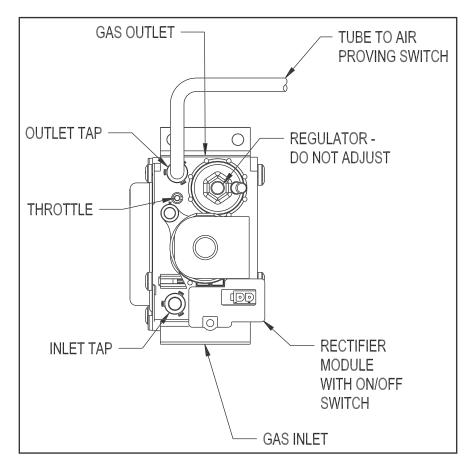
Gas Valve Detail (80MBH Thru 120MBH)
